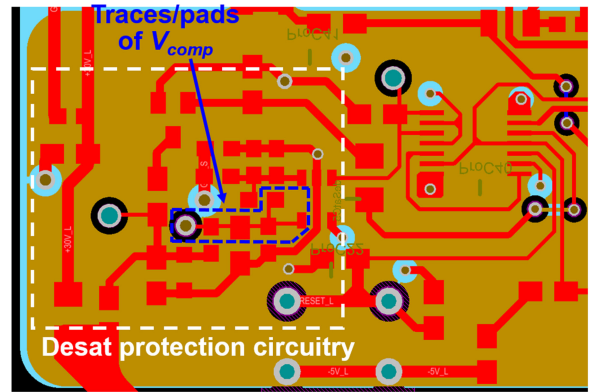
PCB layout details of the shielding layer design in the new proposed desat protection design.
